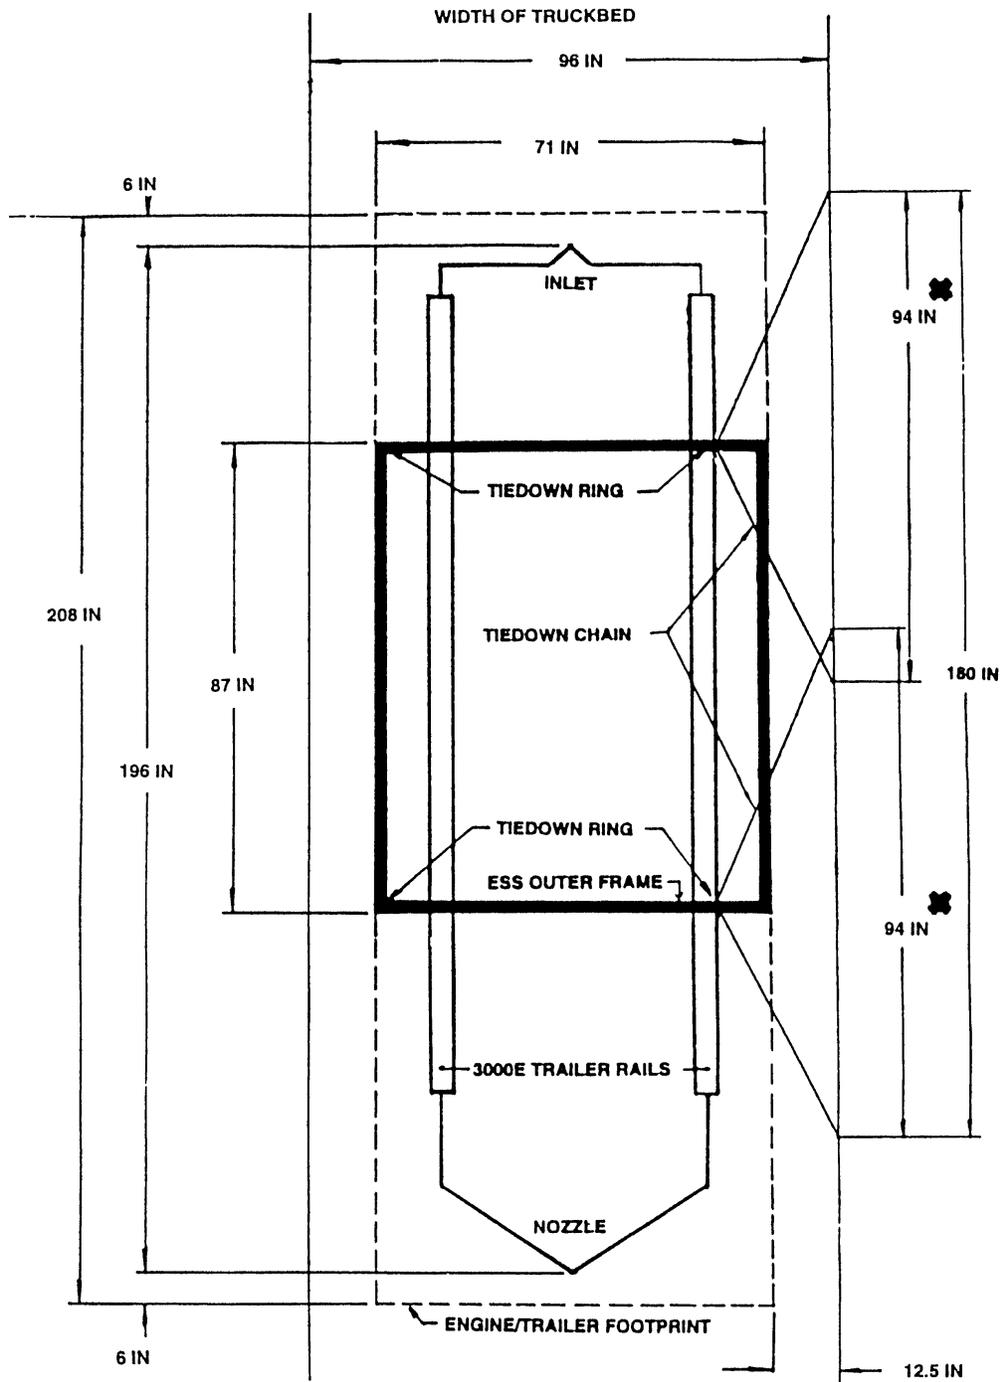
F119/ESS/3000E Overall Dimensions and Truck Tiedown Configuration - Front View
